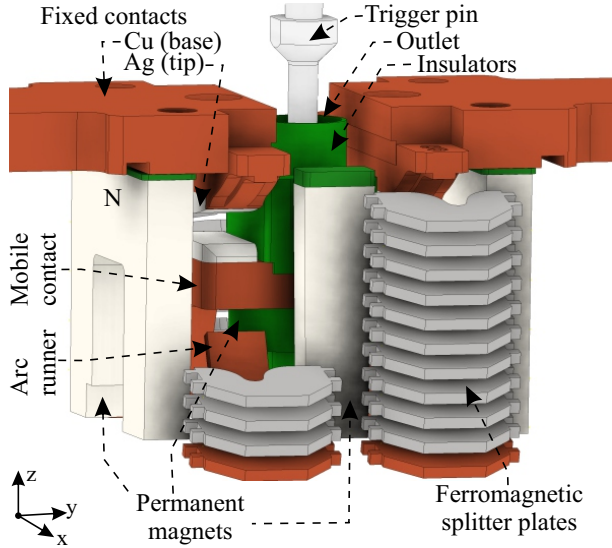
Inner layout of the contactor design; outer housing is dismissed for visualization purposes
